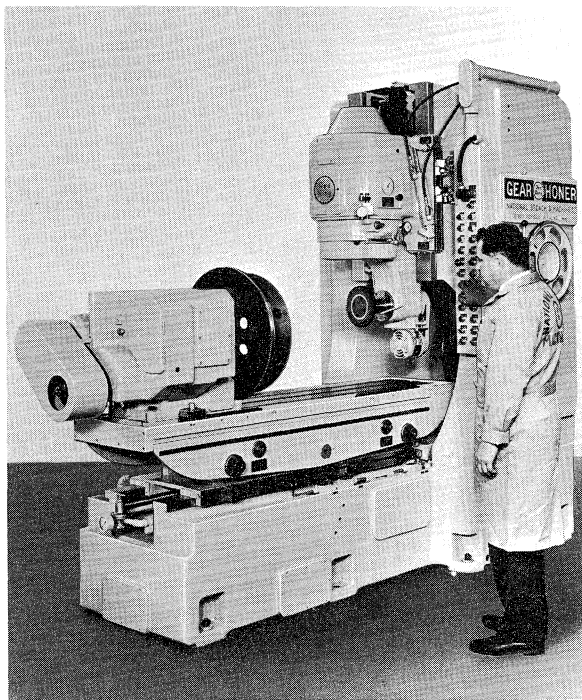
A honing machine for internal gears up to 24-in. diameter.
